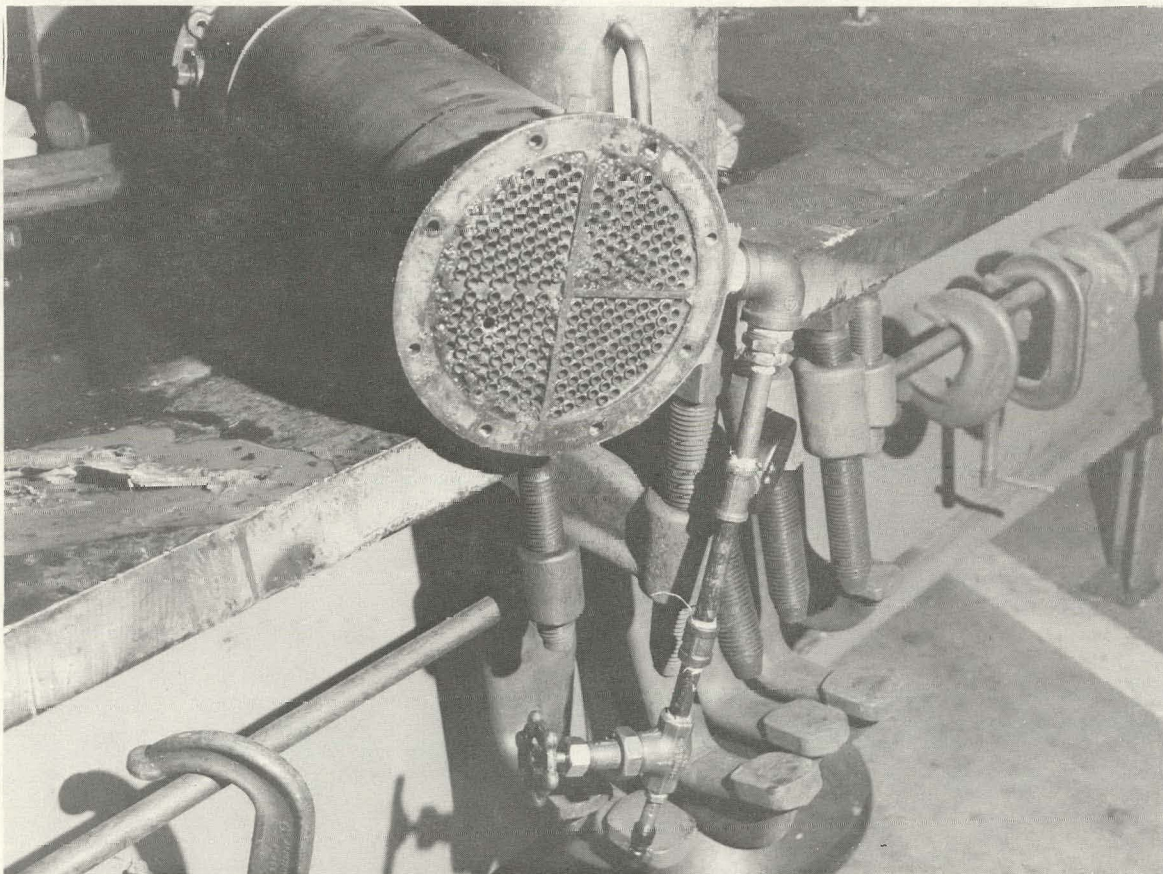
HEAT EXCHANGER WITH A CORRODED COPPER TUBE REMOVED.
